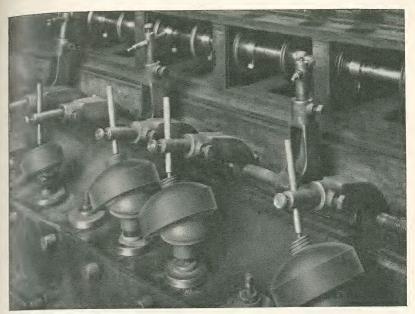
24-Spindle Polishing Machine. (Hilger.)
